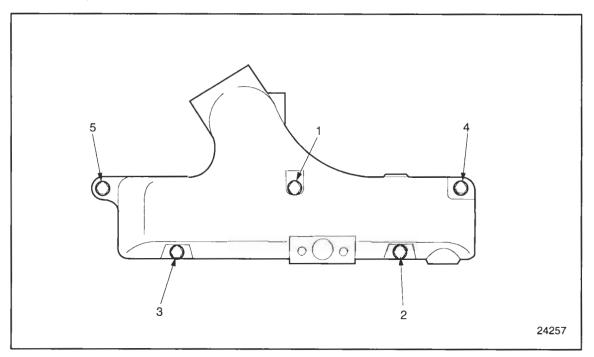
Intake Manifold Bolt Position and Torque Sequence NOTE:
